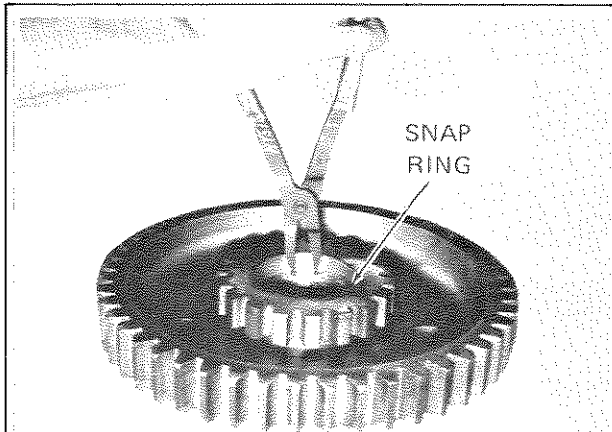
Reassembly And Installation of Brake And Bevel Gear Shaft Assembly (Sheet 4 of 4)
